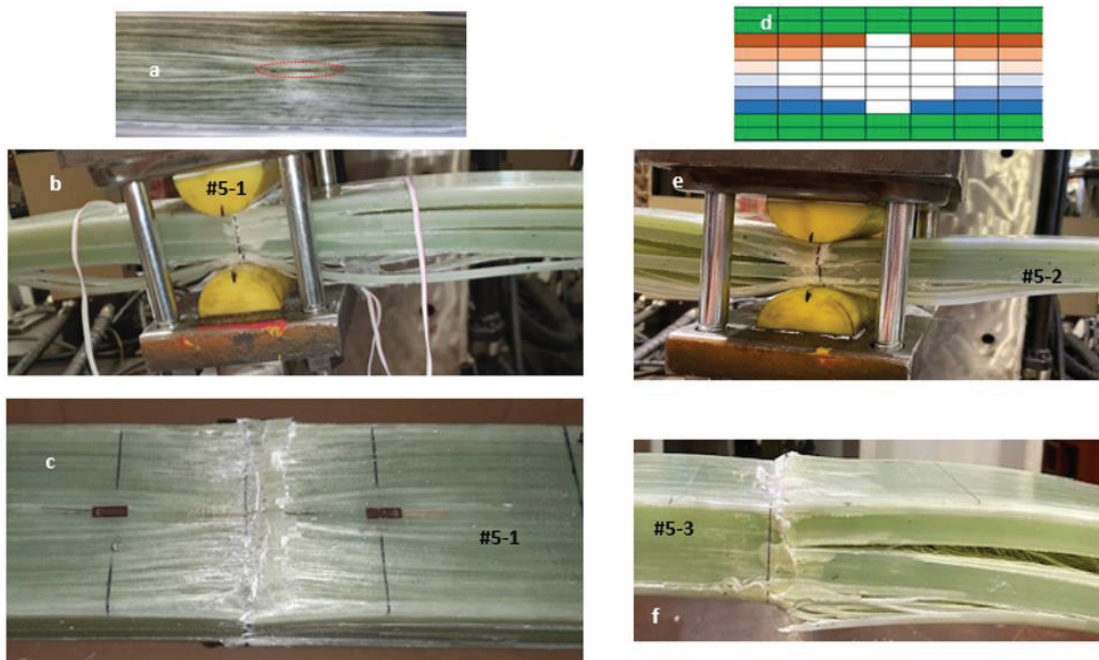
Sample #5 Fmax Test. a-Sample #5 center top view b-Sample 1 after breaking side view on the rig c- Sample 1 top view after failure d- General layout design of Sample #4 top view e-Sample 2 after failure side view on the rig f-Sample 3 after failure side view.
